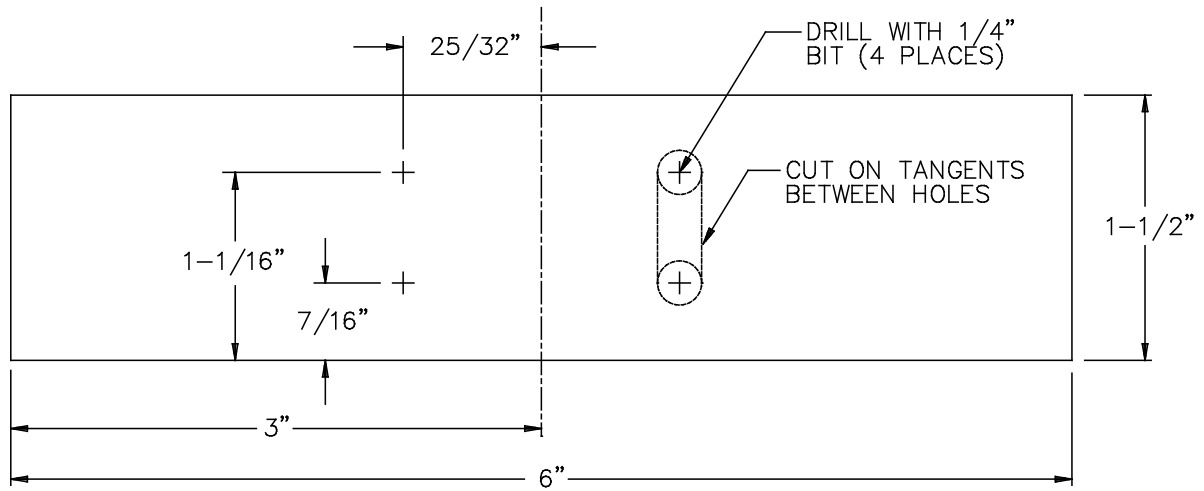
Cutting and Drilling the Nose Gear Leg Fairing Mounting Brackets
